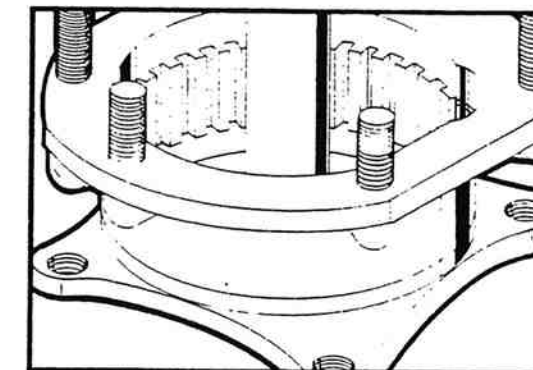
Drive Gear Removal from Drive Gear Bore.
